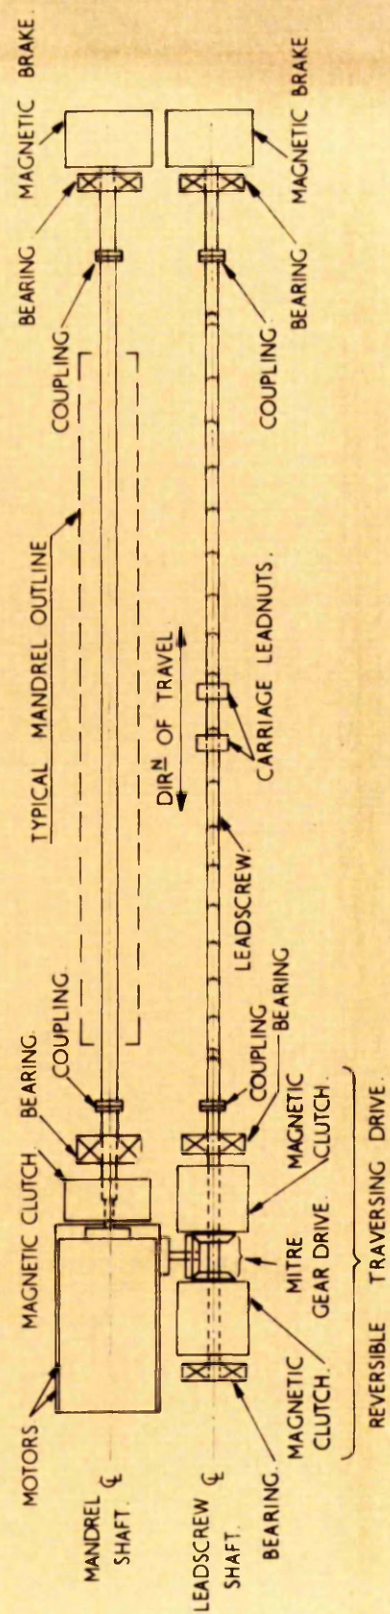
LAYOUT PLAN OF MANDREL AND LEADSCREW DRIVES.
